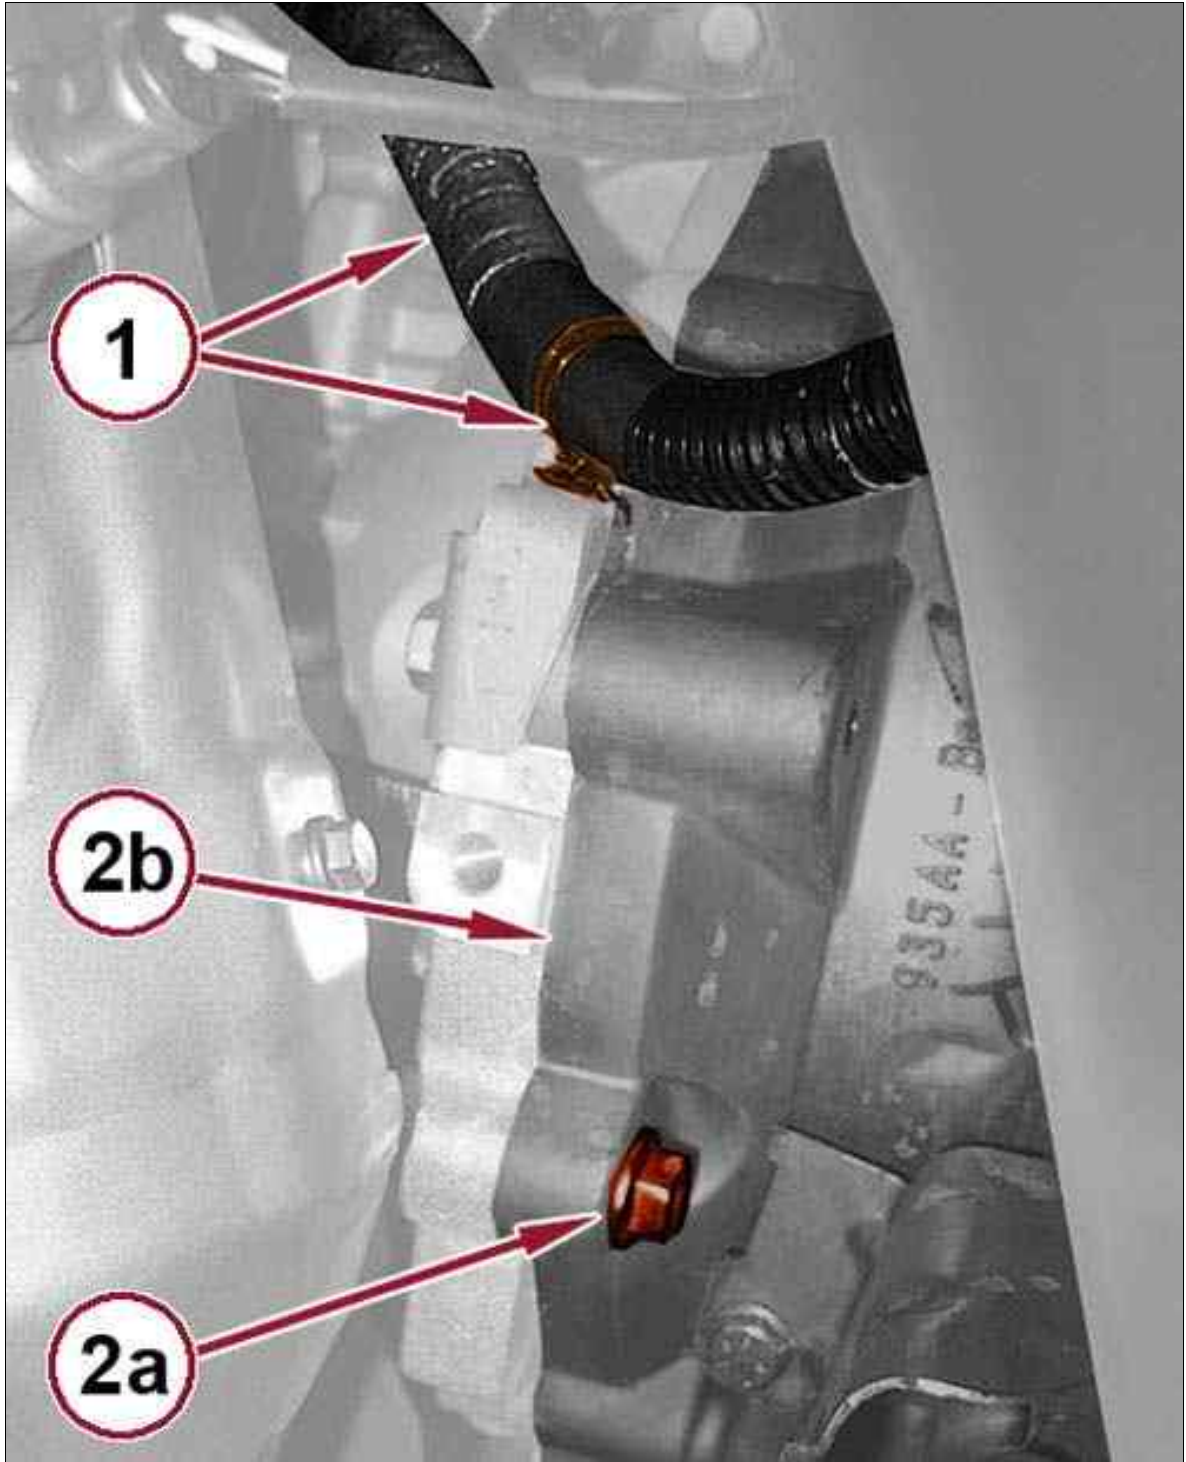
Exhaust Side Upper Transmission To Engine Block Bolt
